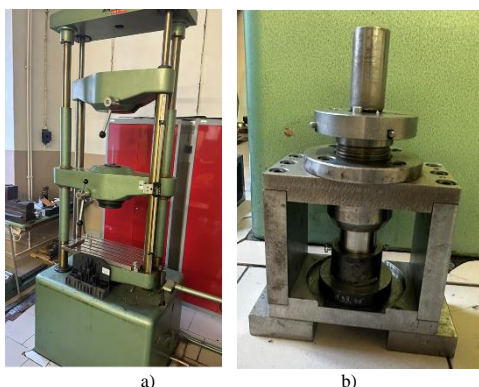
a) Hydraulic press ZD-40, b) experimental deep-drawing tool
